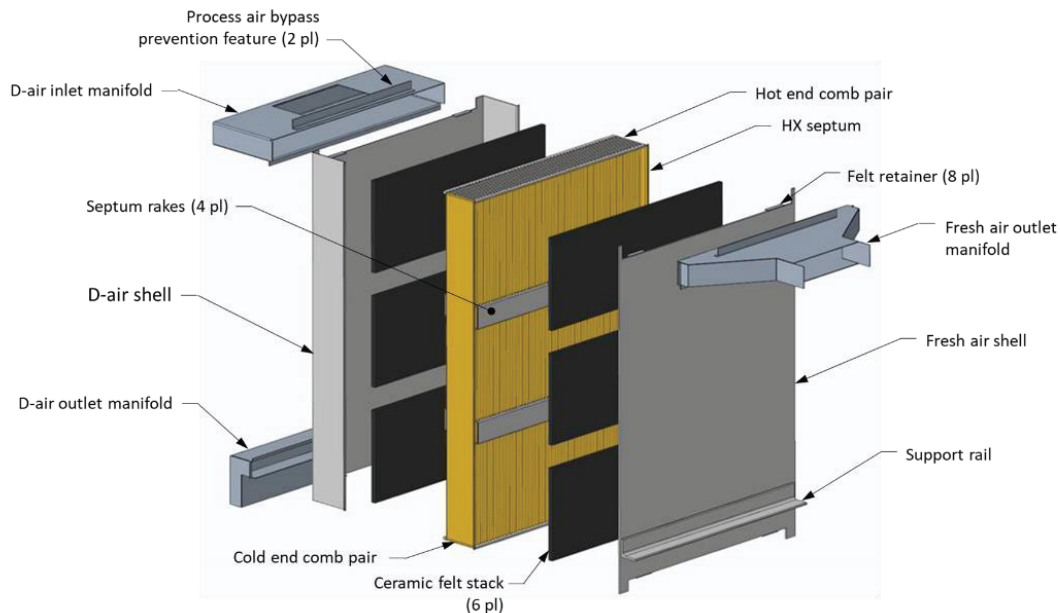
Exploded View of Counterflow Heat Exchanger used in T Configuration M-COG
